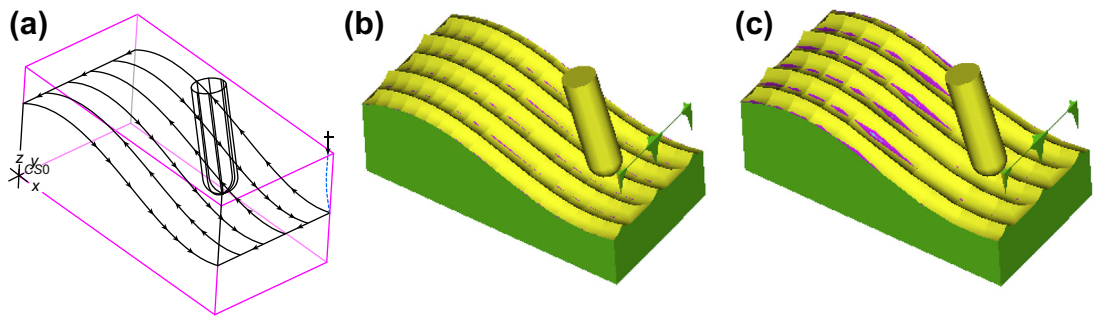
Contour surface milling for a cylindrical surface: (a) toolpath (tolerance = 0.01 in.), (b) machined surface (tolerance = 0.01 in.), and (c) machined surface (tolerance = 0.1 in.).
